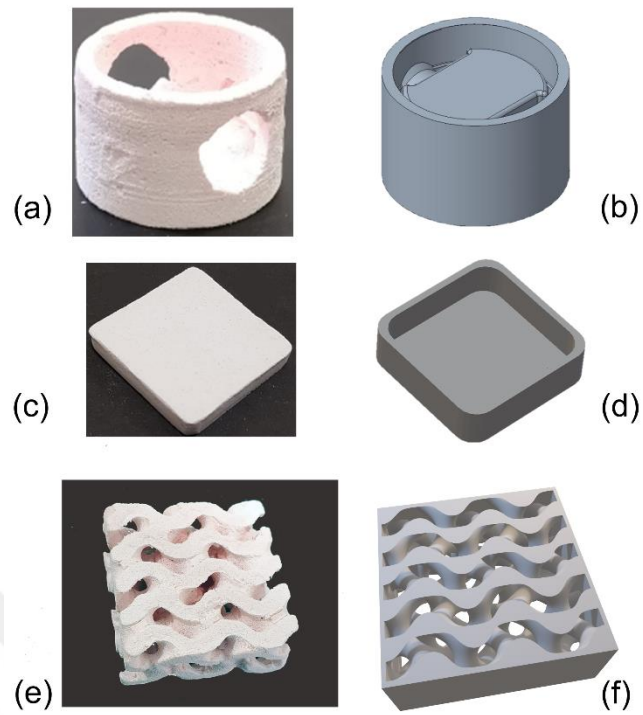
(a) Demolded piston part (b) piston mold (c) demolded cube part (d) cube mold (e) demolded complex gyroid part (f) complex gyroid mold
